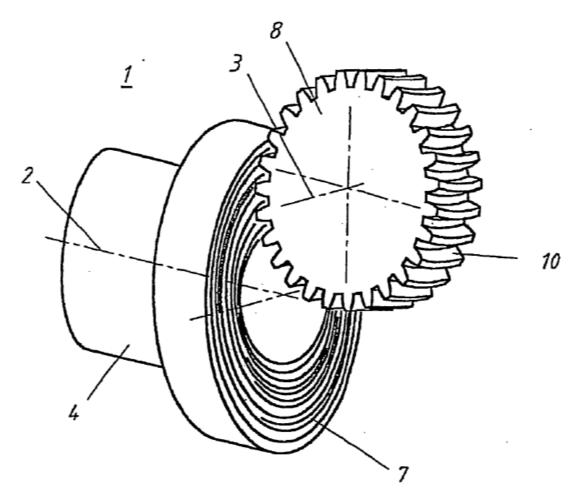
illustrates a gearing involving only two intermeshing members (4) and (8), with non-parallel axes (2) and (3). Intermeshing member (4) has spiral teeth. The gearing does not have conical gears.
